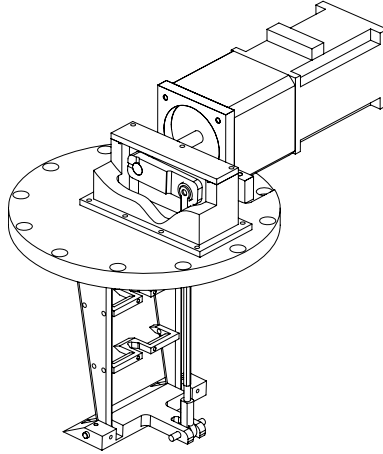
Wedge assembly consisting of a wedge, a connecting rod, a support structure, a motor, and a gearhead.
